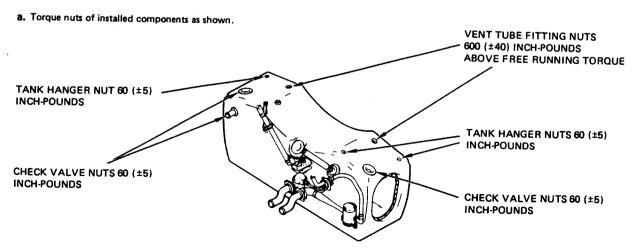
Installation; Main Sump Tank (Sheet 3)
